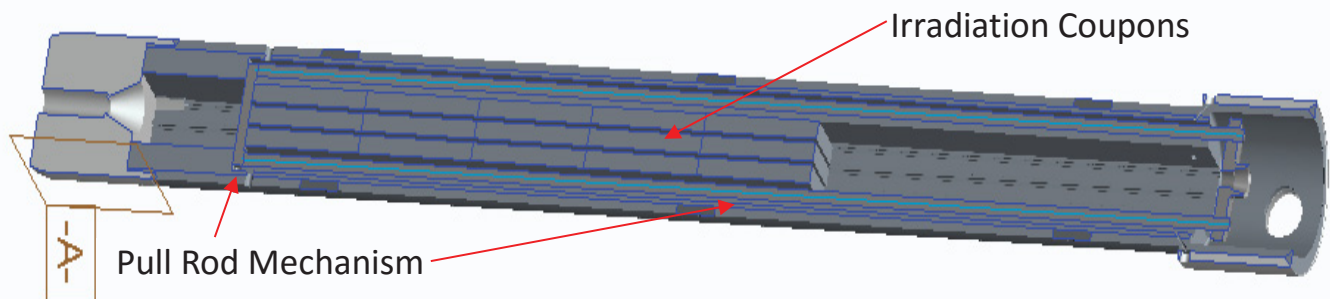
CAD drawing of the redesigned sample holder with pull rod mechanism
